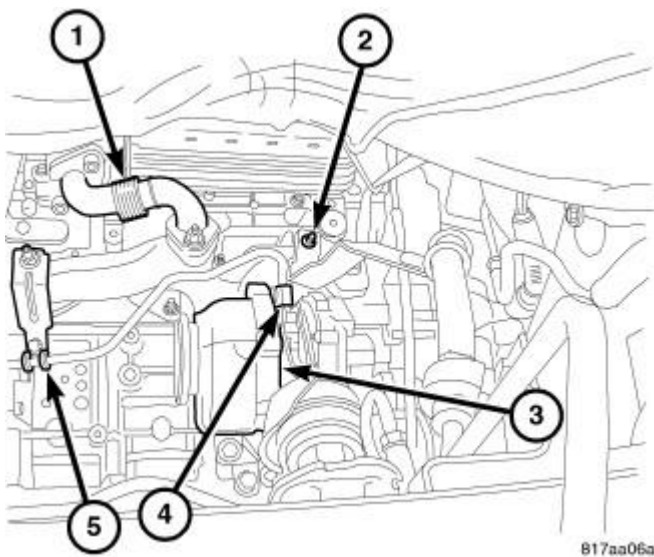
Exhaust Manifold/Turbo Assembly
